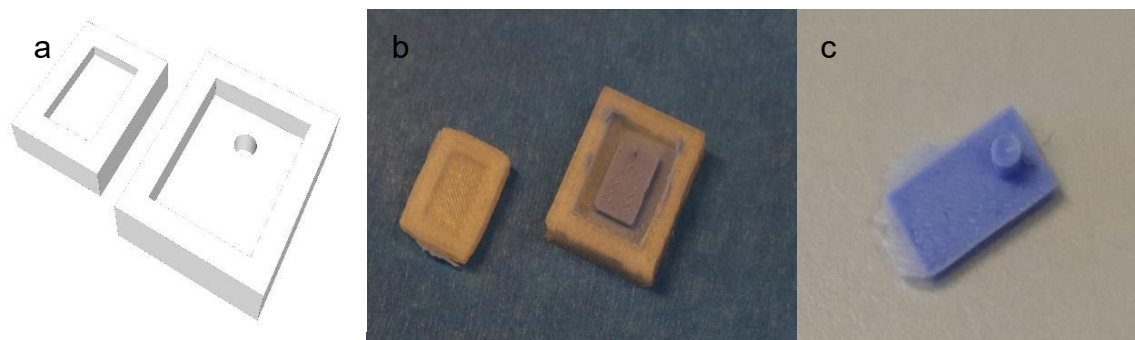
PLA mould design for a silicone insert, 3D printed PLA mould for insert and silicone insert. a) CAD design created in Google Sketch Up (64 bit) 2017 for the PLA mould for the insert. b) 3D printed PLA mould printed using Ultimaker 3 extended. c) Silicone insert created from the 3D printed PLA mould. Results representative of the production of over 10 silicone casts.
